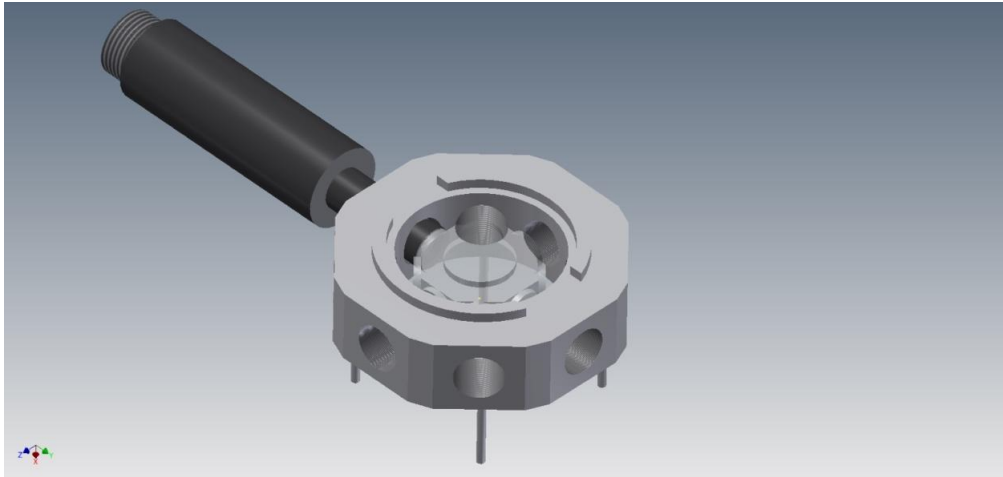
Opto-mechanical drawing of the objective, the macor and the vacuum cell. At this figure the way that all the parts are designed to fit together is shown. The lens tube is putted very close to the glass window.
